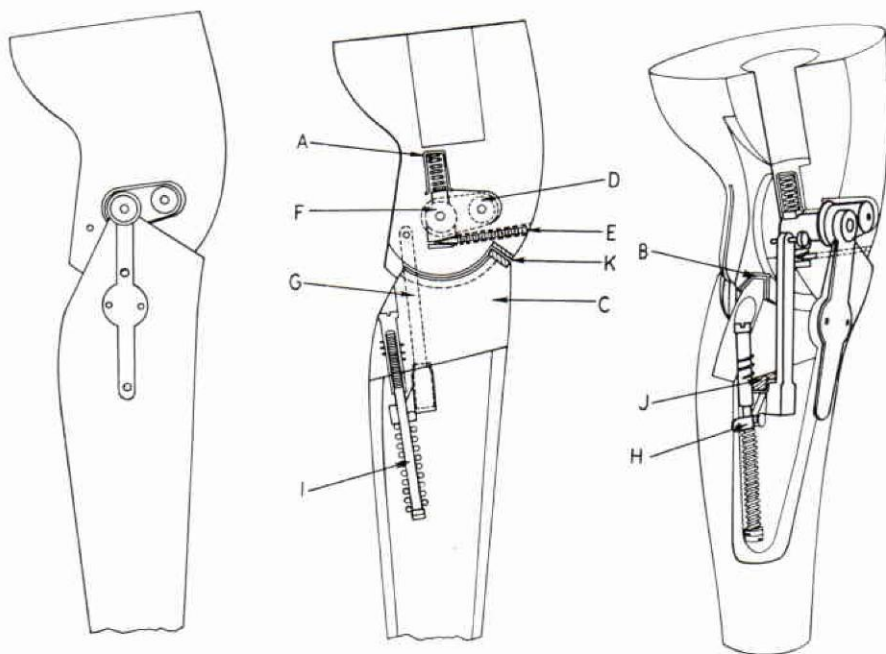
Schematic Drawings of the Otto Bock Safety Knee.
